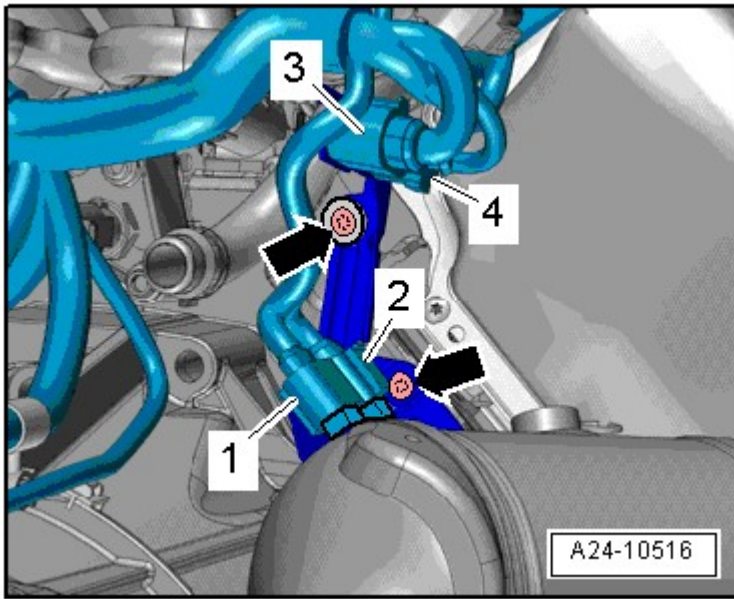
Identifying Bolts -Arrows- And Right Connector Bracket
